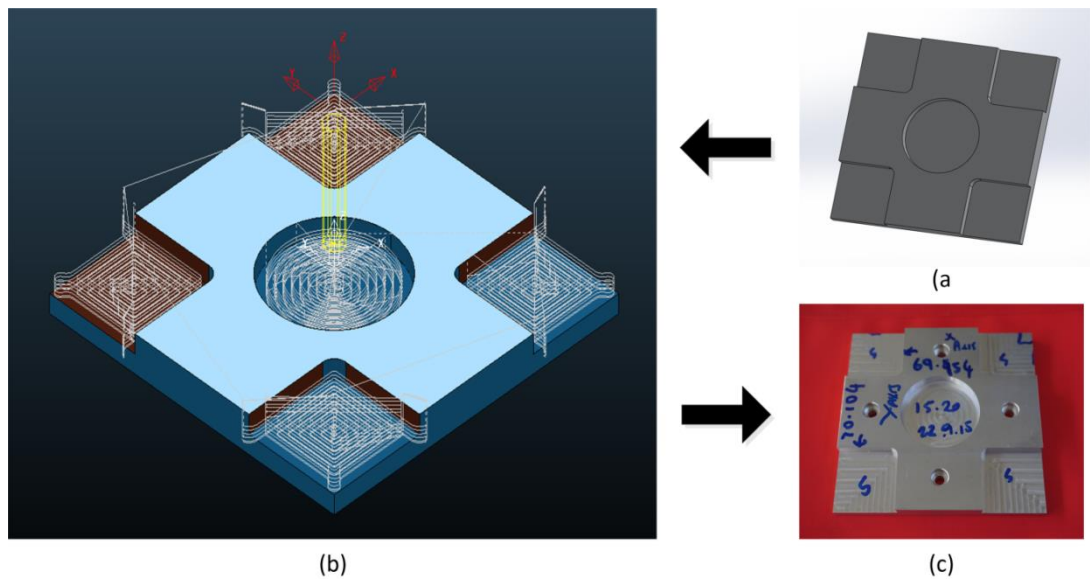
Design and manufacturing procedures for the experimental workpiece: (a) design and simulation, (b) tool path generation, and (c) machined sample workpiece
